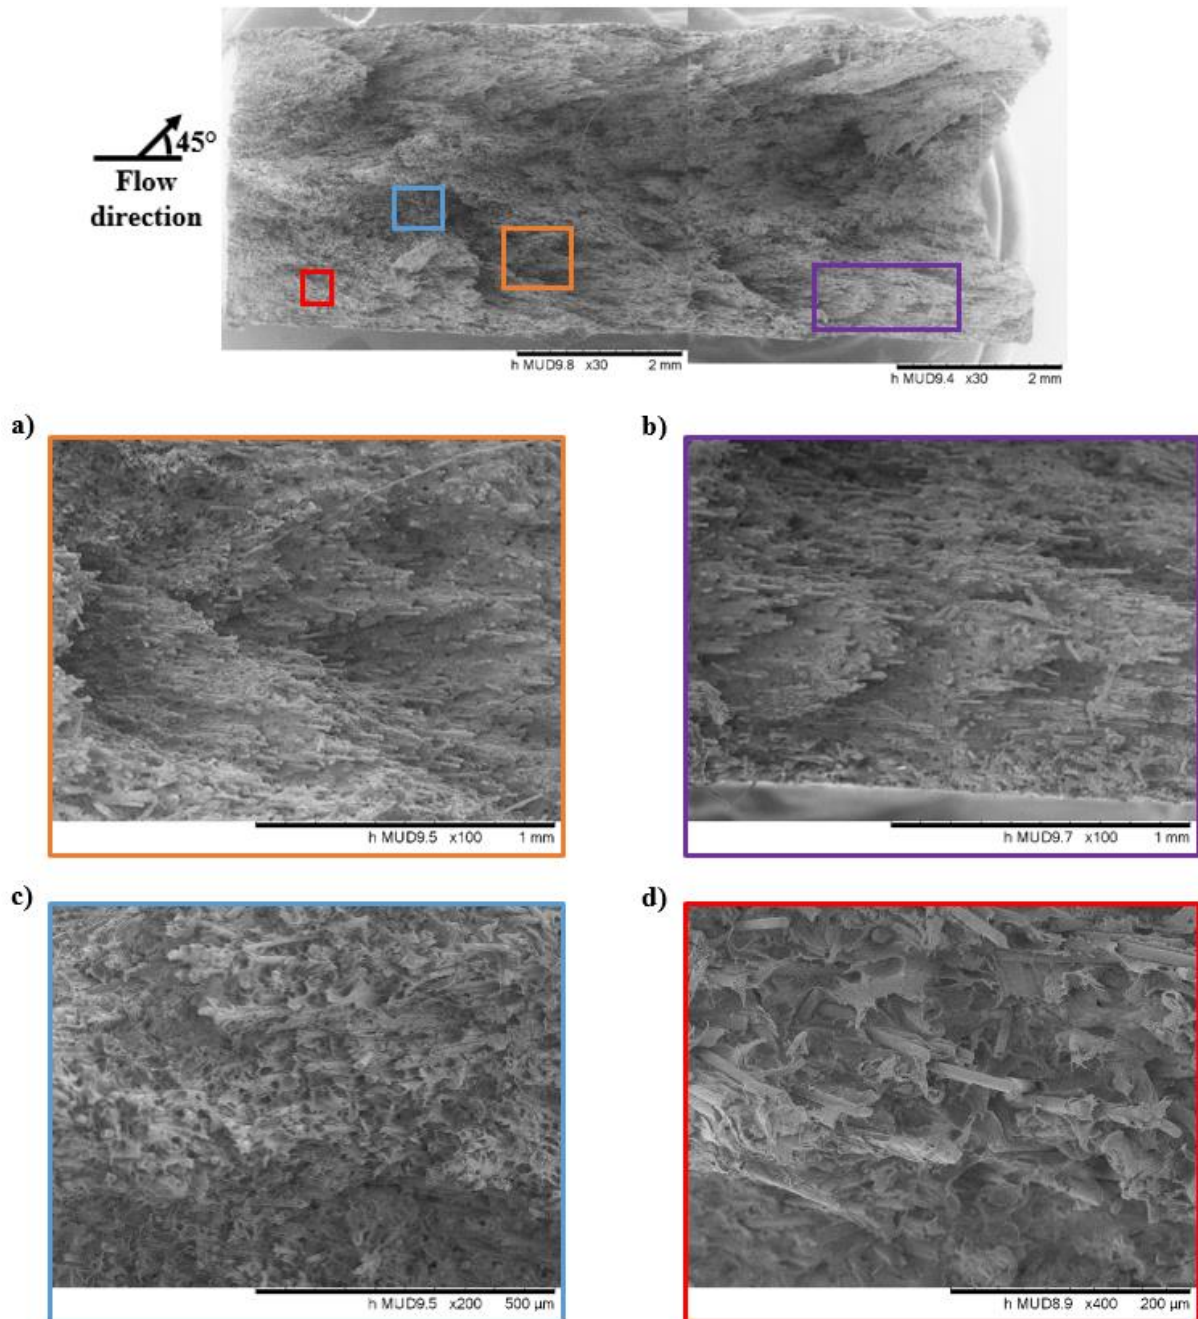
Fracture surface of a tensile 45° specimen at 100° C
